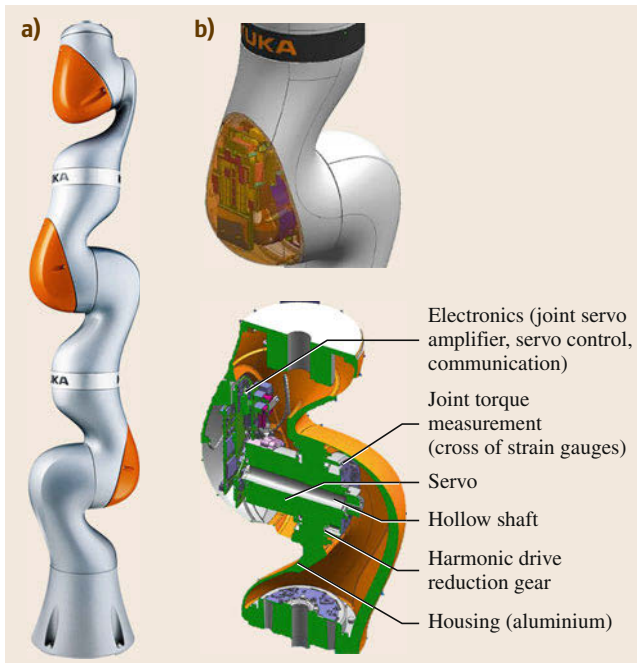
,b Design of the KUKA iiwa: (a) Shape and (b) integration of joint mechatronics
